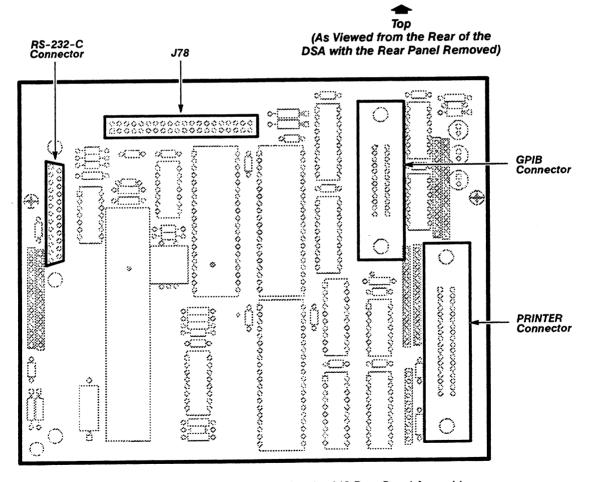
Removing/Replacing the A12 Rear Panel Assembly
